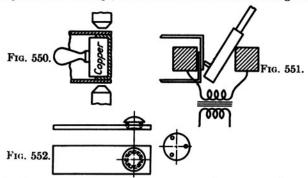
Welding both sides of a box form simultaneously, by employing a shunt-block device.
